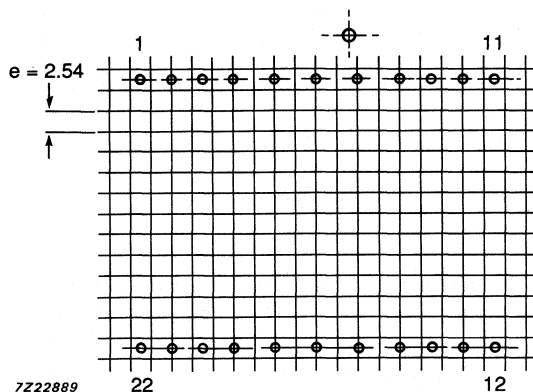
Hole pattern for mounting on a printed-wiring board (solder side).
